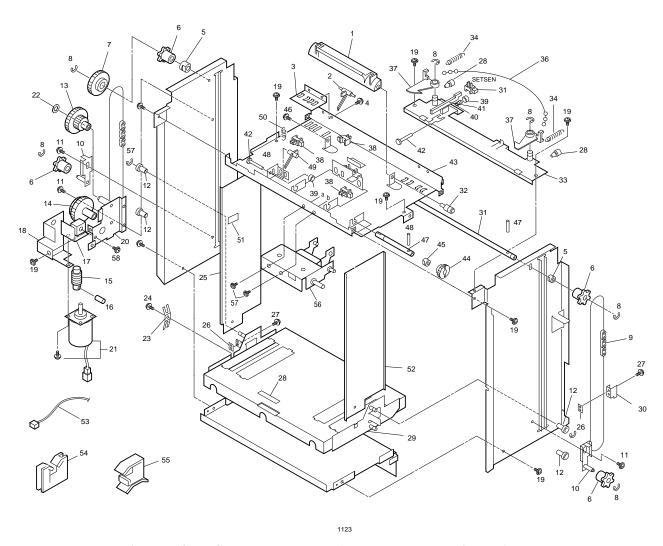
LCIF Paper Transport Assembly Parts Locational Diagram
